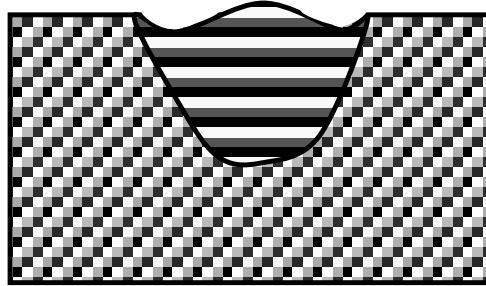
Typical cross-section of the “pre-humping” regime weld.
